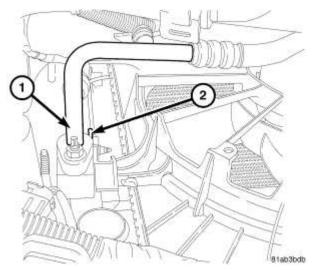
Identifying A/C Line Courtesy of CHRYSLER LLC
